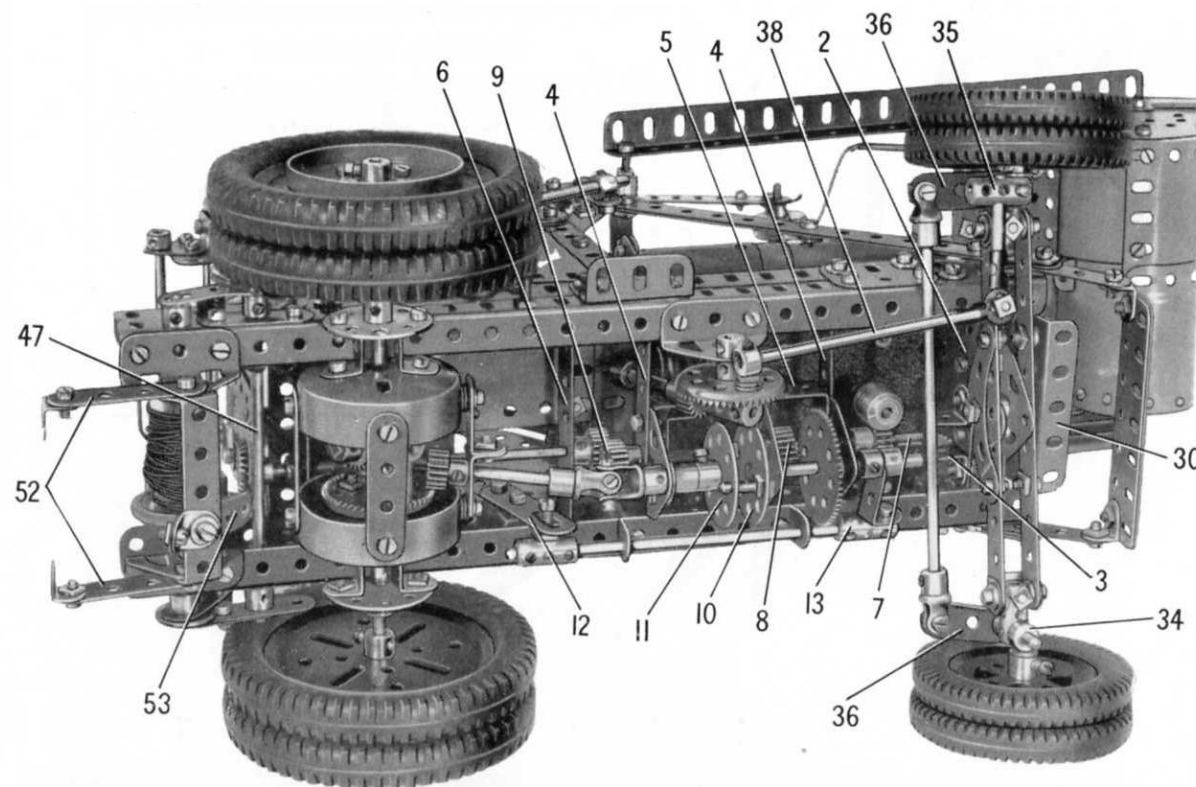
The Lifting Shovel seen from underneath, with the reduction gearing and the driving mechanism clearly shown
